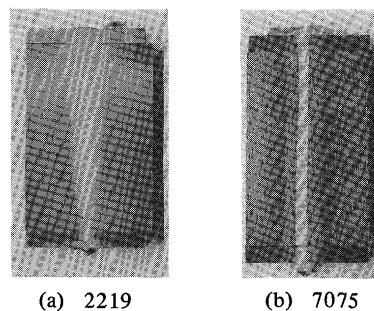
Lateral cross-section of welded bead (full penetrated, 57mm[†])
